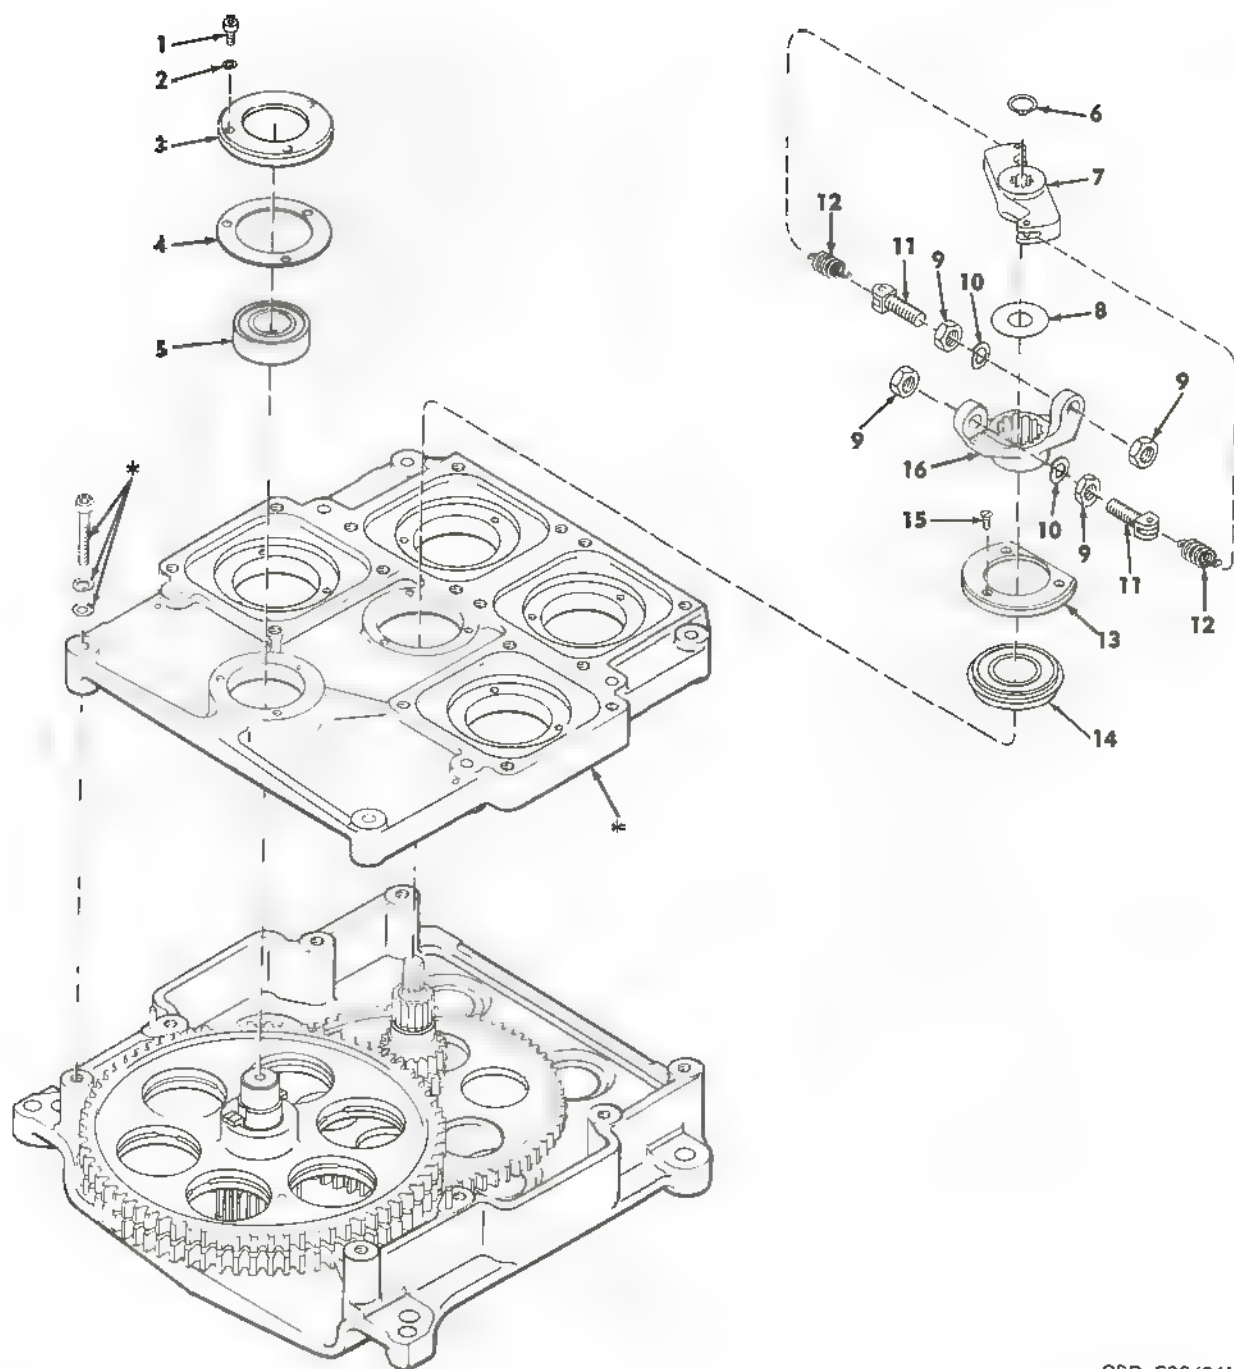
DRIVE /8170973/ PARTIAL EXPLODED VIEW
